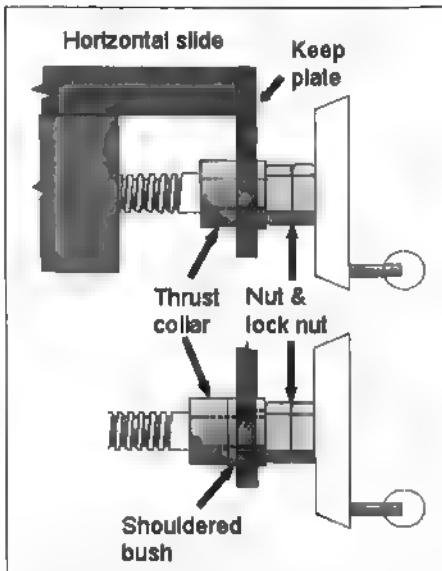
A thrust collar (top) and a thrust collar with a shouldered bush (bottom) fitted to the cross-slide of a lathe.
